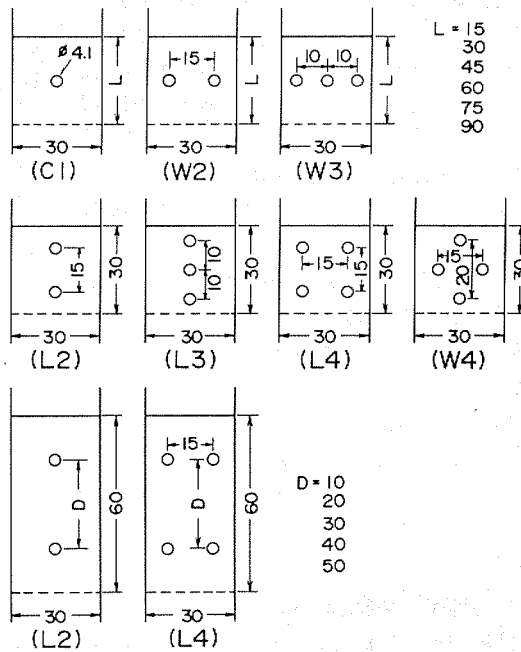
Shape and dimension of lap shear specimens. (○: Position of rivets)
